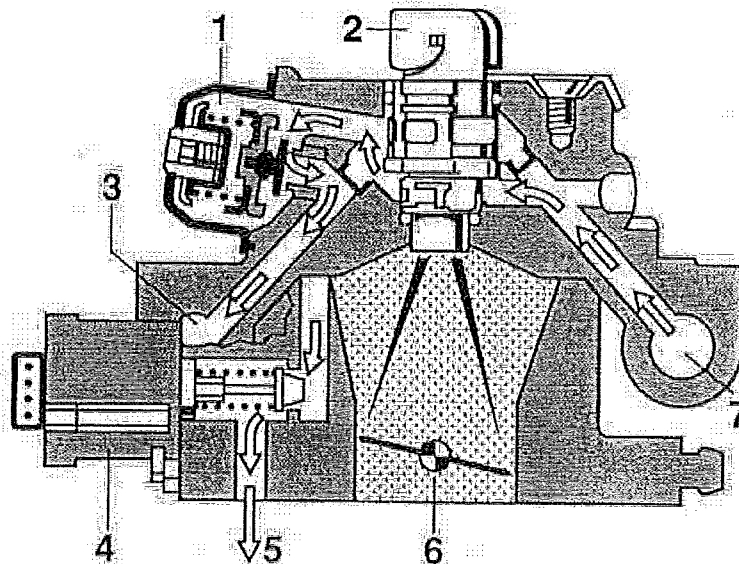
Single-point injection unit: pressure regulator (1), injector (2), fuel return (3), stepper motor for idle speed control (4), to intake manifold (5), throttle valve (6), and fuel inlet (7).
